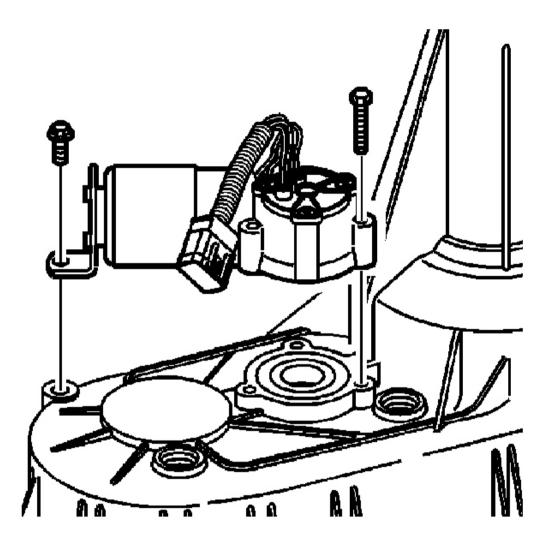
Transfer Case Encoder Motor Courtesy of GENERAL MOTORS CORP.
